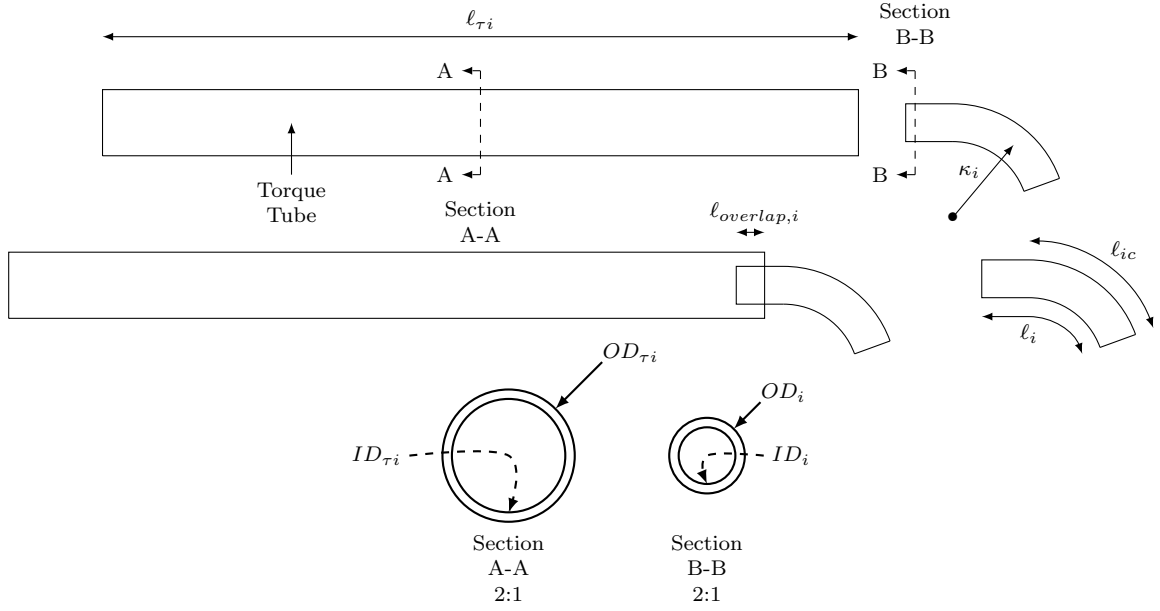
A torque tube assembled to a nitinol tube. We utilize torque tubes made from stainless steel.
